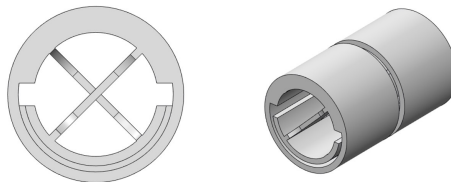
Common Cantilevered Flexure Bearing Design [33]
